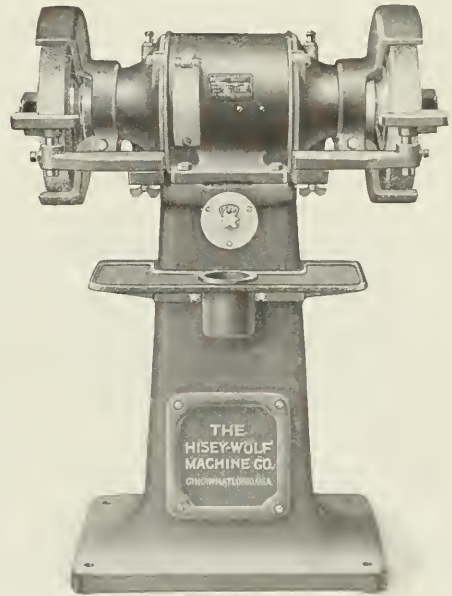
Same Machine shown in Fig. 1 mounted on Column
